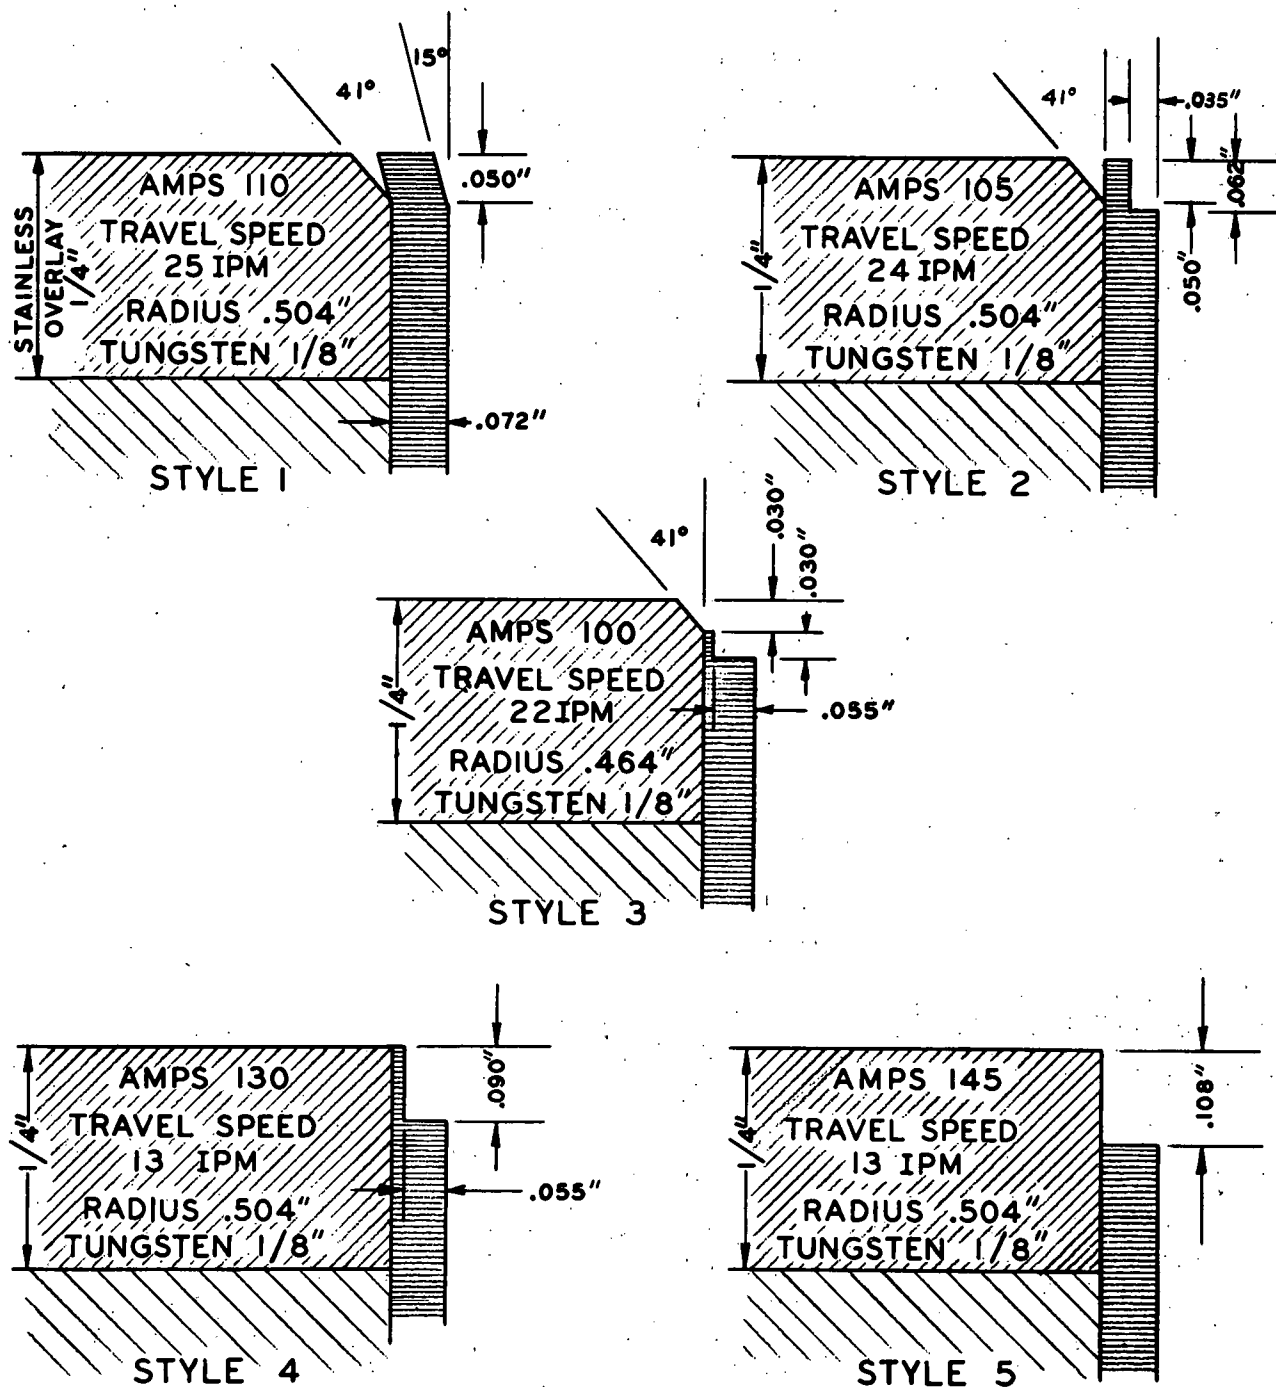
DETAILS OF JOINT DESIGNS USED FOR AUTOMATIC TUNGSTEN-ARC WELDING TYPE 430 M TUBES TO STAINLESS STEEL OVERLAY.
